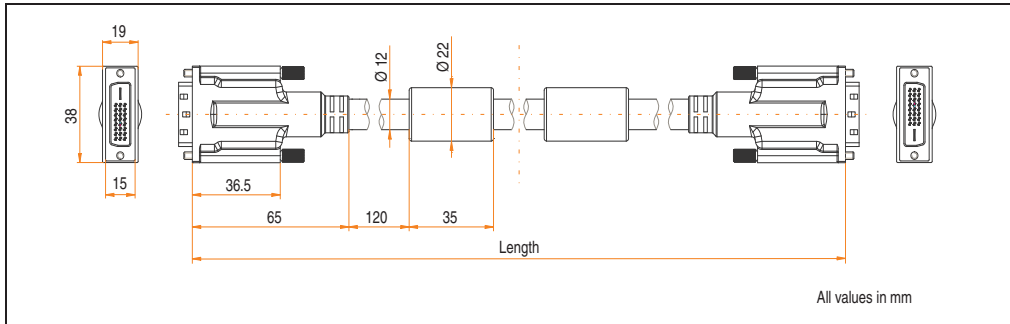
Dimensions - SDL cable 5CASDL.0xxx-03
